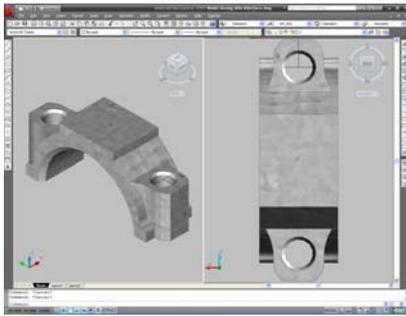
A complete appearance of the bottom halve of connection rod large fist component with assigned material-constructional steel
